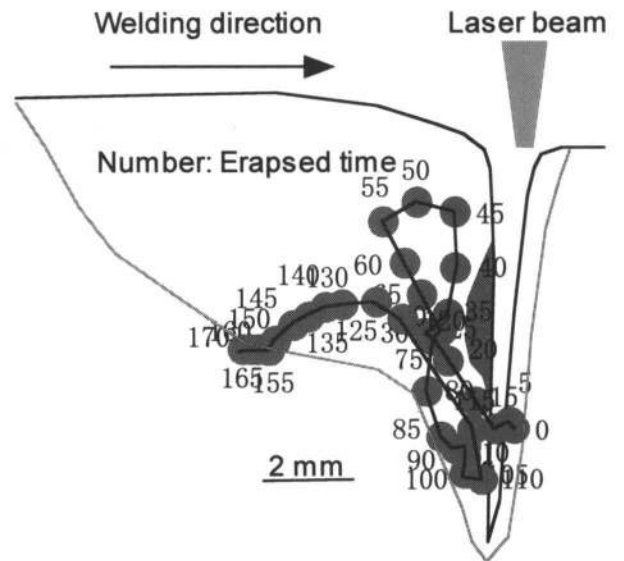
Measured movement of W particle inside molten pool of Type 304 steel, indicating typical liquid flow observed at the bottom part of the weld pool of stainless steel.
